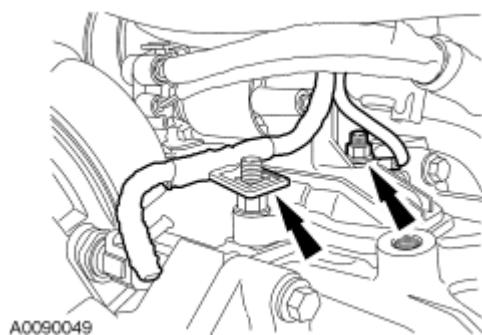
Locating Wire Harness Clip Retainer & Starter Bolts
